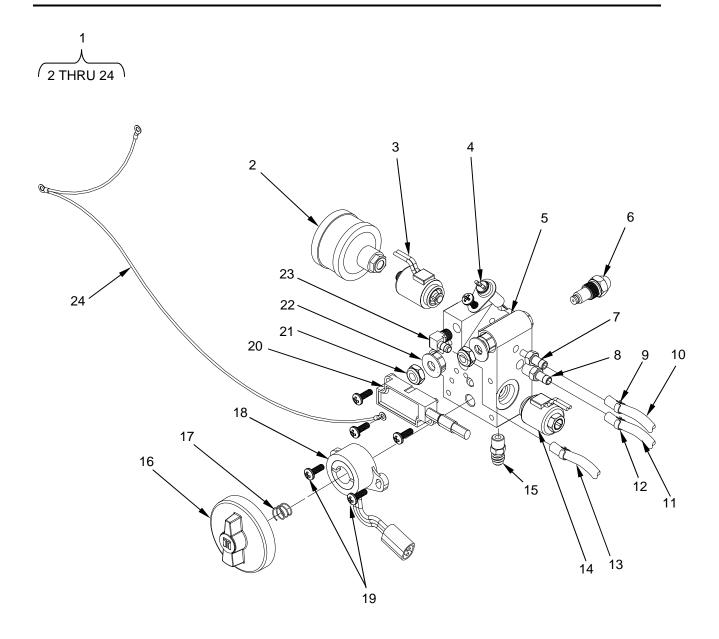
Fuel Delivery Block Assembly (Sheet 1 of 2).
